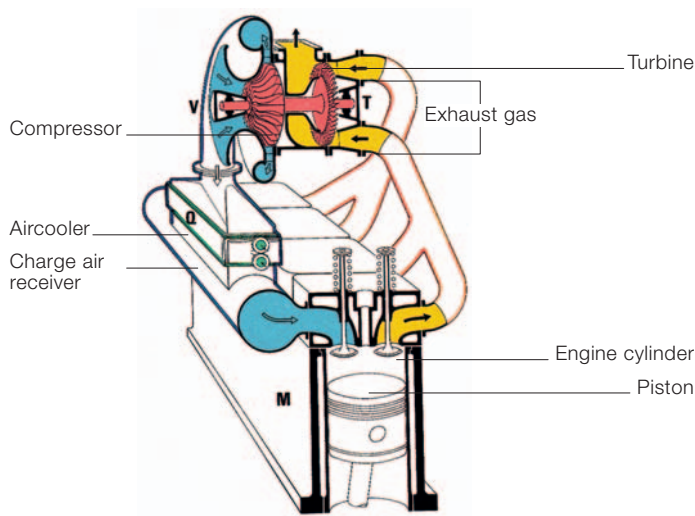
Cutaway drawing of a turbocharged diesel engine.
